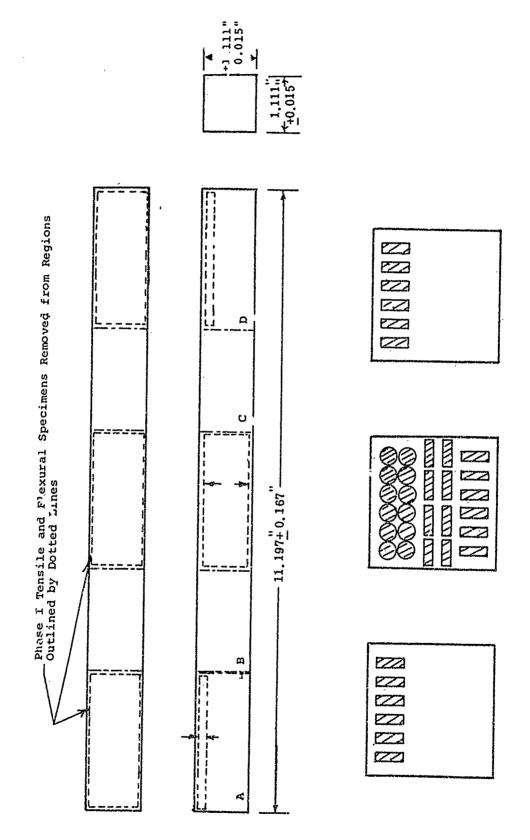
Cutting Plan - Specimen Blanks 3A09-136 and 3A09-137
